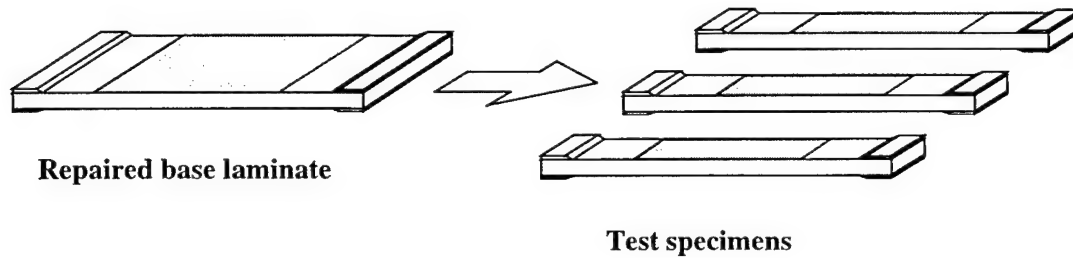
TEST SPECIMENS CUT OUT OF THE REPAIRED BASE LAMINATE
